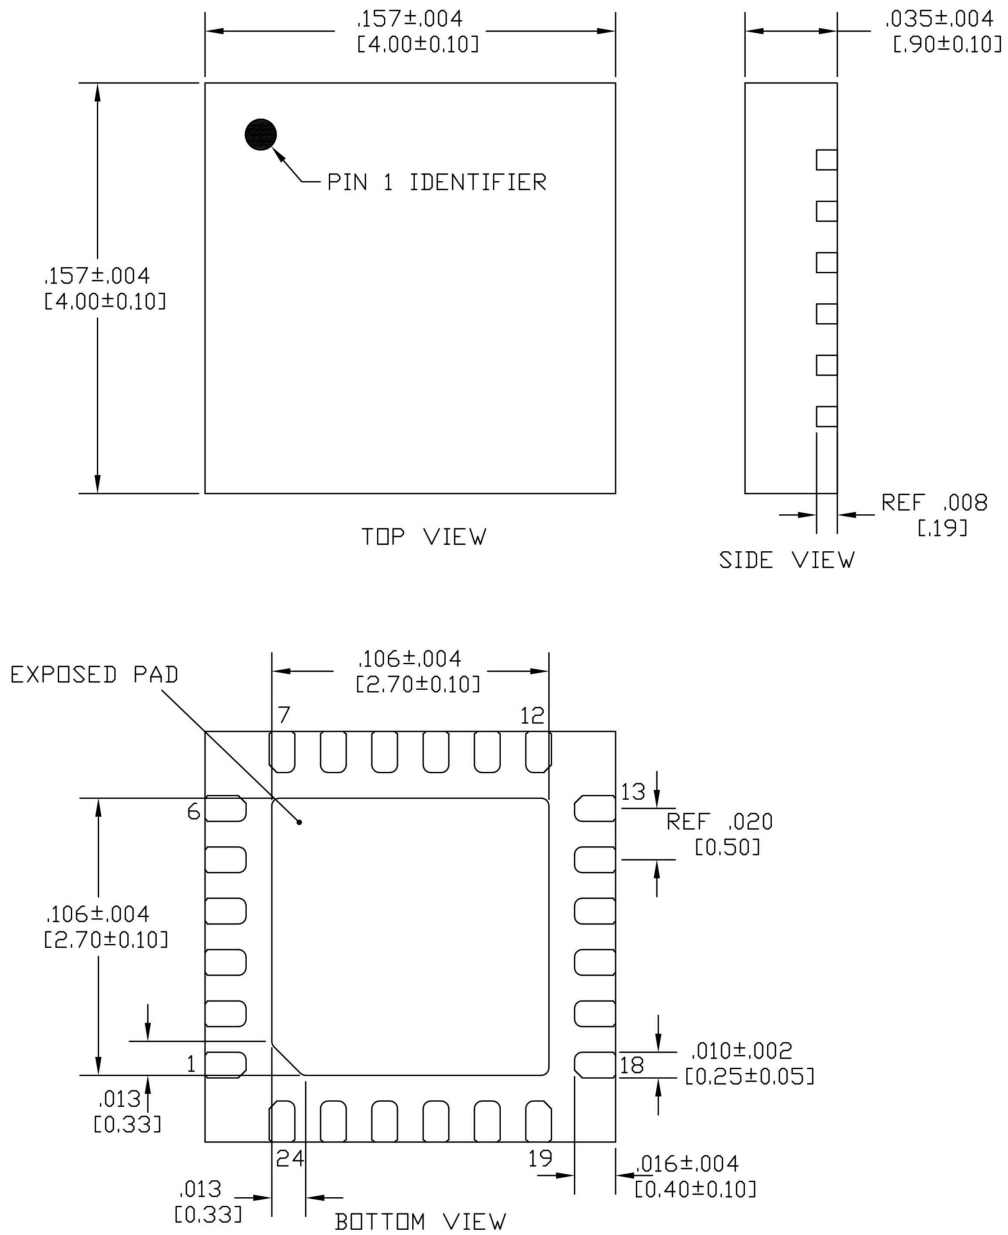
QFN4X4-24 Plastic Package Dimensions (all dimensions in inches [millimeters])
